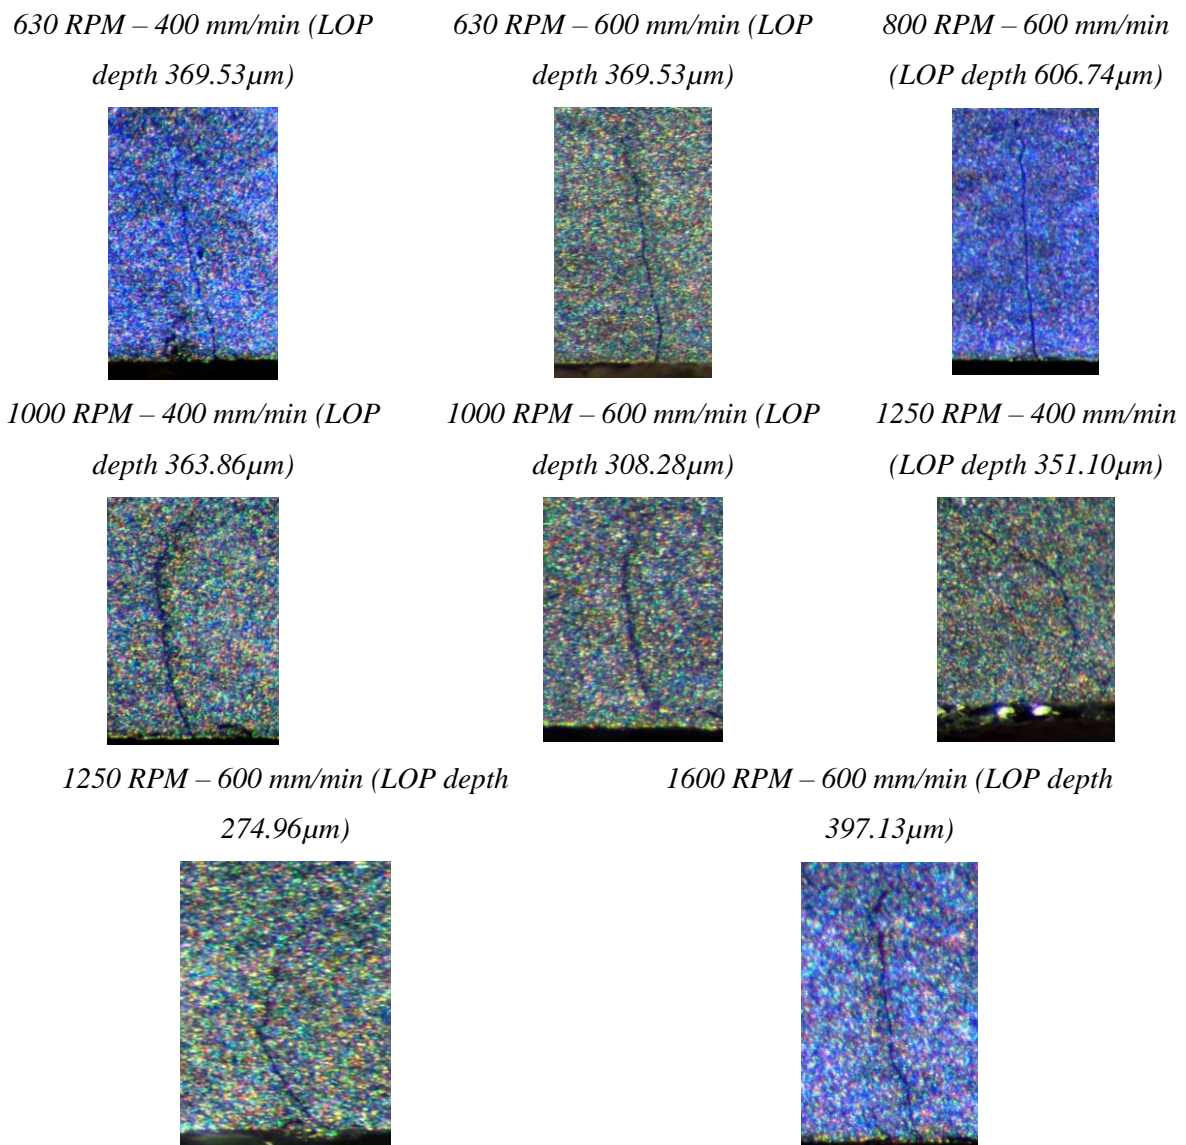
Examples of Lack of Penetration defects in Friction Stir Welding Joints with various Parameter Combinations
